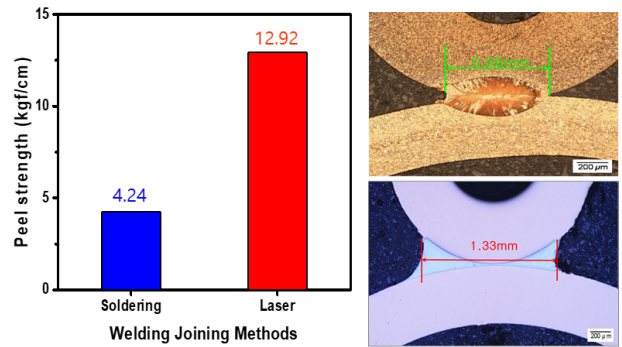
Solder and laser welding macro structure and joint strength analysis
